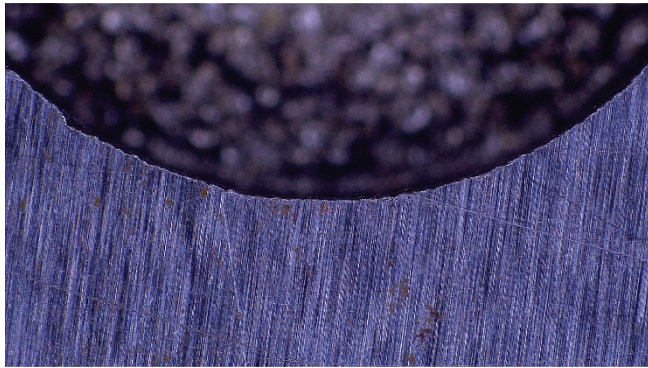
Workpiece surface for a bar stock produced EDM electrode (control, sample 10)
